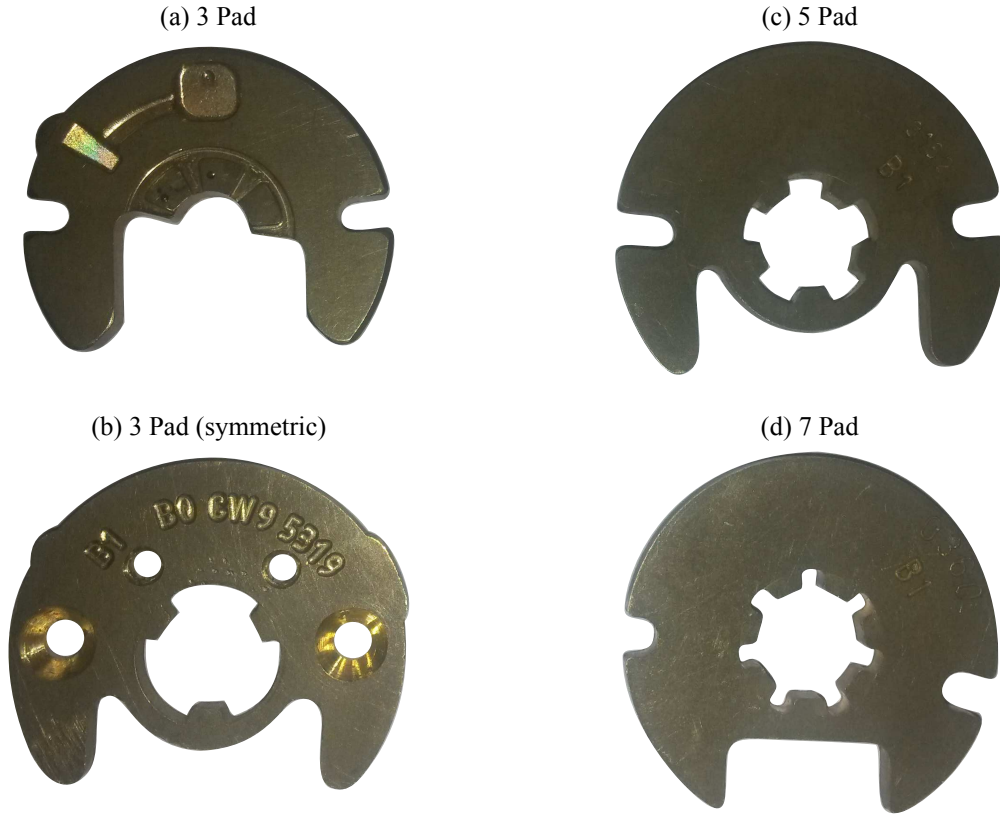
Types of thrust bearings: (a) 3 pad, (b) 3 pad (symmetric), (c) 5 pad, (d) 7 pad
